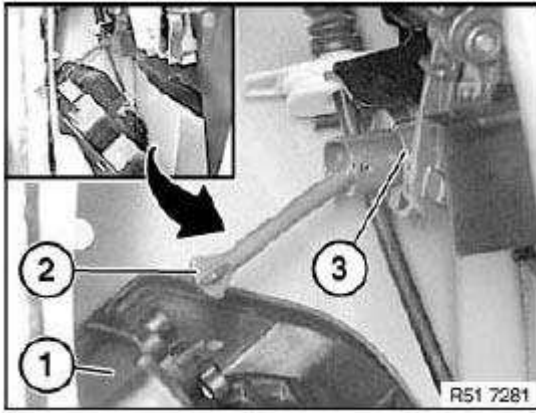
Inside Door Lock, Paddle And Lock Cylinder
